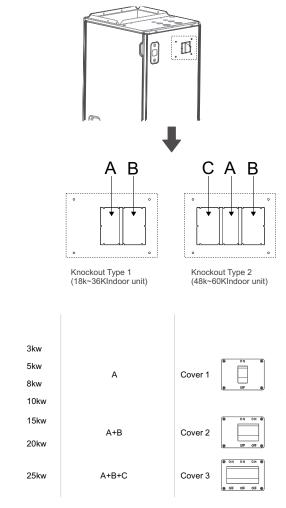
Install Front Panel and Silicone Breaker Cover
